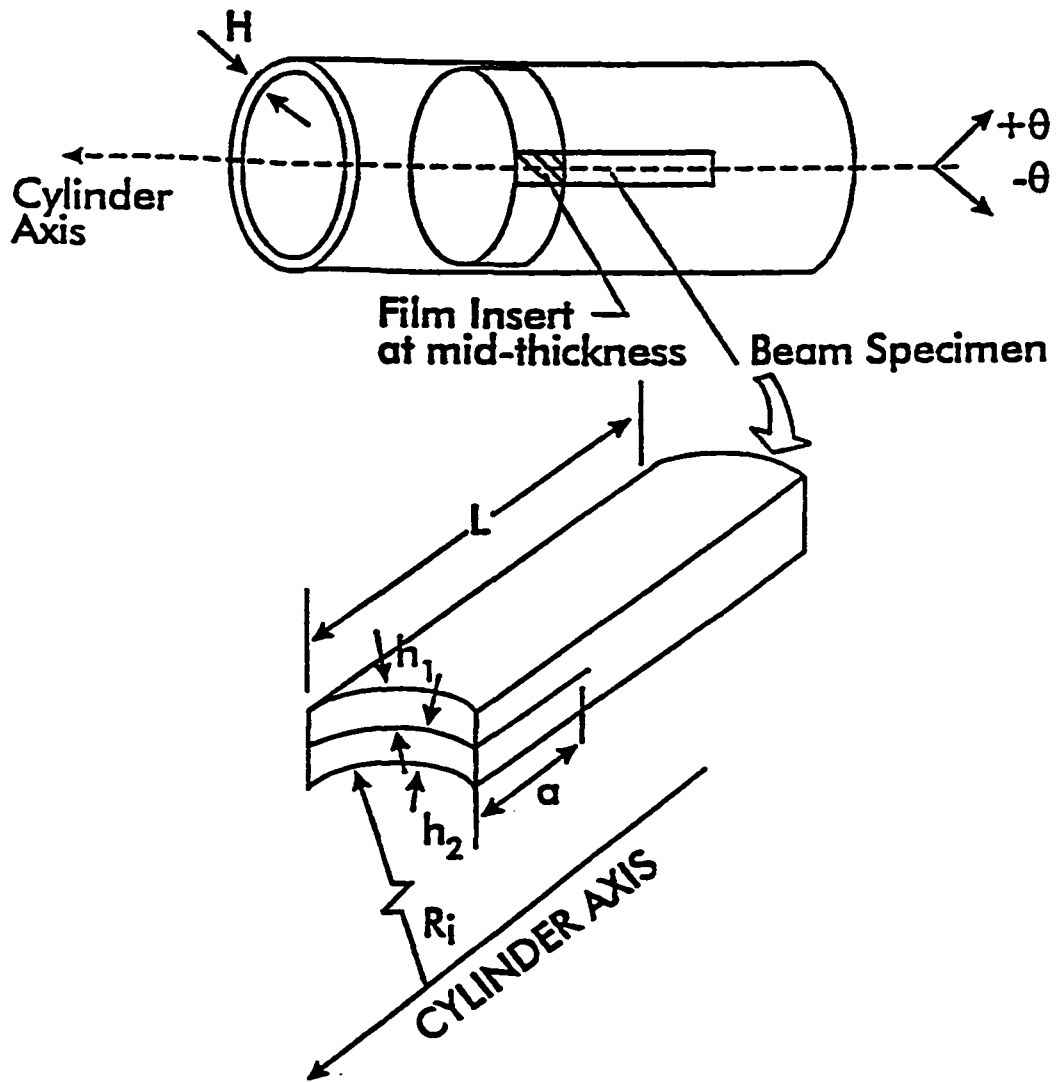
Beam fracture specimens machined from angle-ply, filament wound cylinders.
